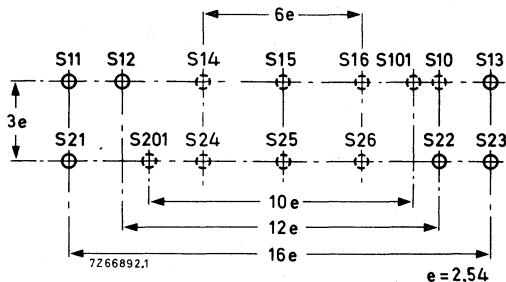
Hole pattern of the printed-wiring board for a tandem potentiometer (viewed on component side).
